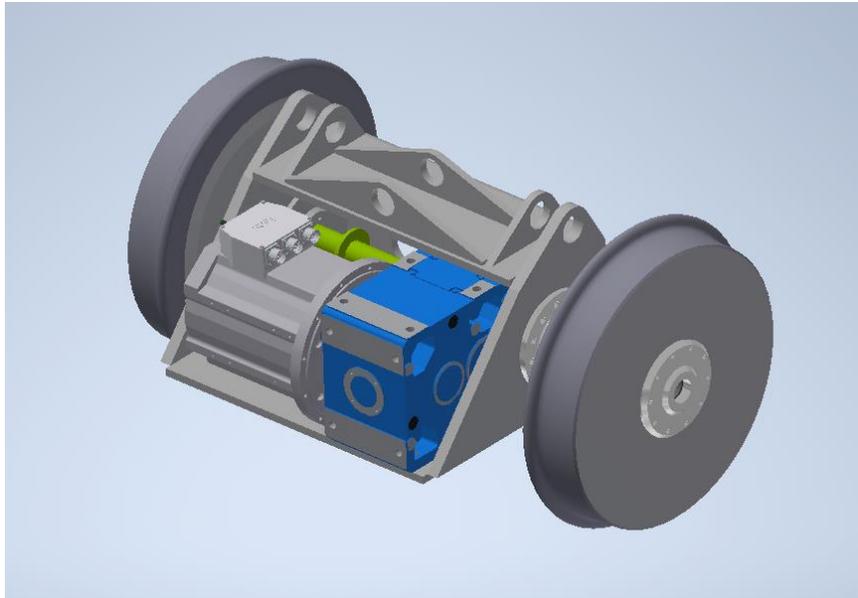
Early CAD model of the AB combination concept. Motor, gearbox(blue) and drive axle(green) are placed in a box shaped steel structure. A disc brake can be mounted at the flange of the driven axle and the steel structure protects all parts during derailment.
